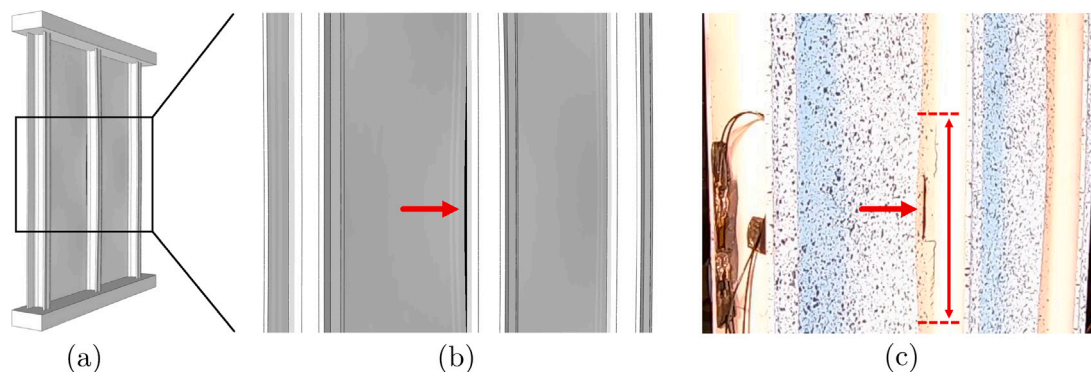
Crack opening seen from left side of panel 1 at 156 kN: (a) full view of panel; (b) close-up FE; (c) close-up camera footage with visual separation length marked in red.
